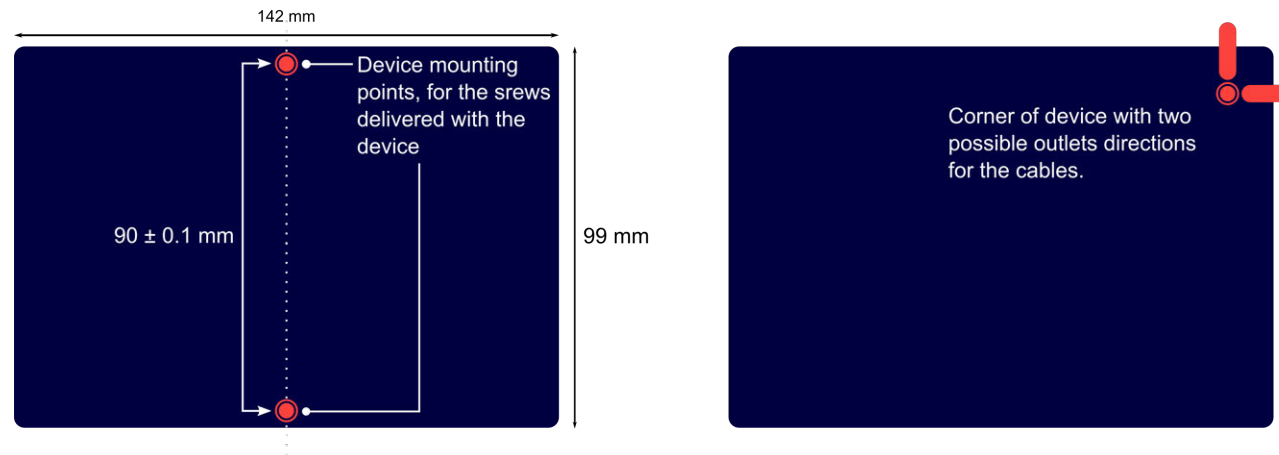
Schematic device top view showing the mounting points and cable outlet options
